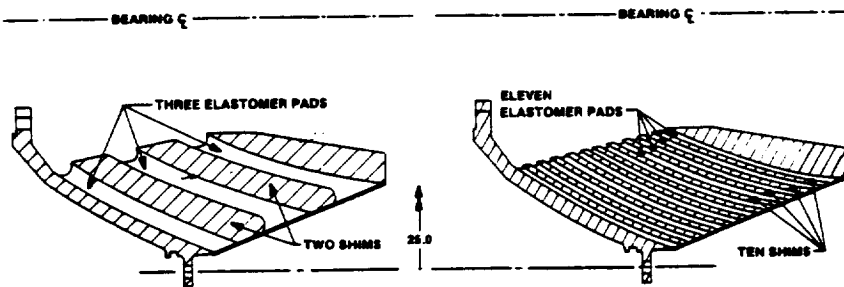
SUBSCALE FLEXIBLE BEARING DETAILS
